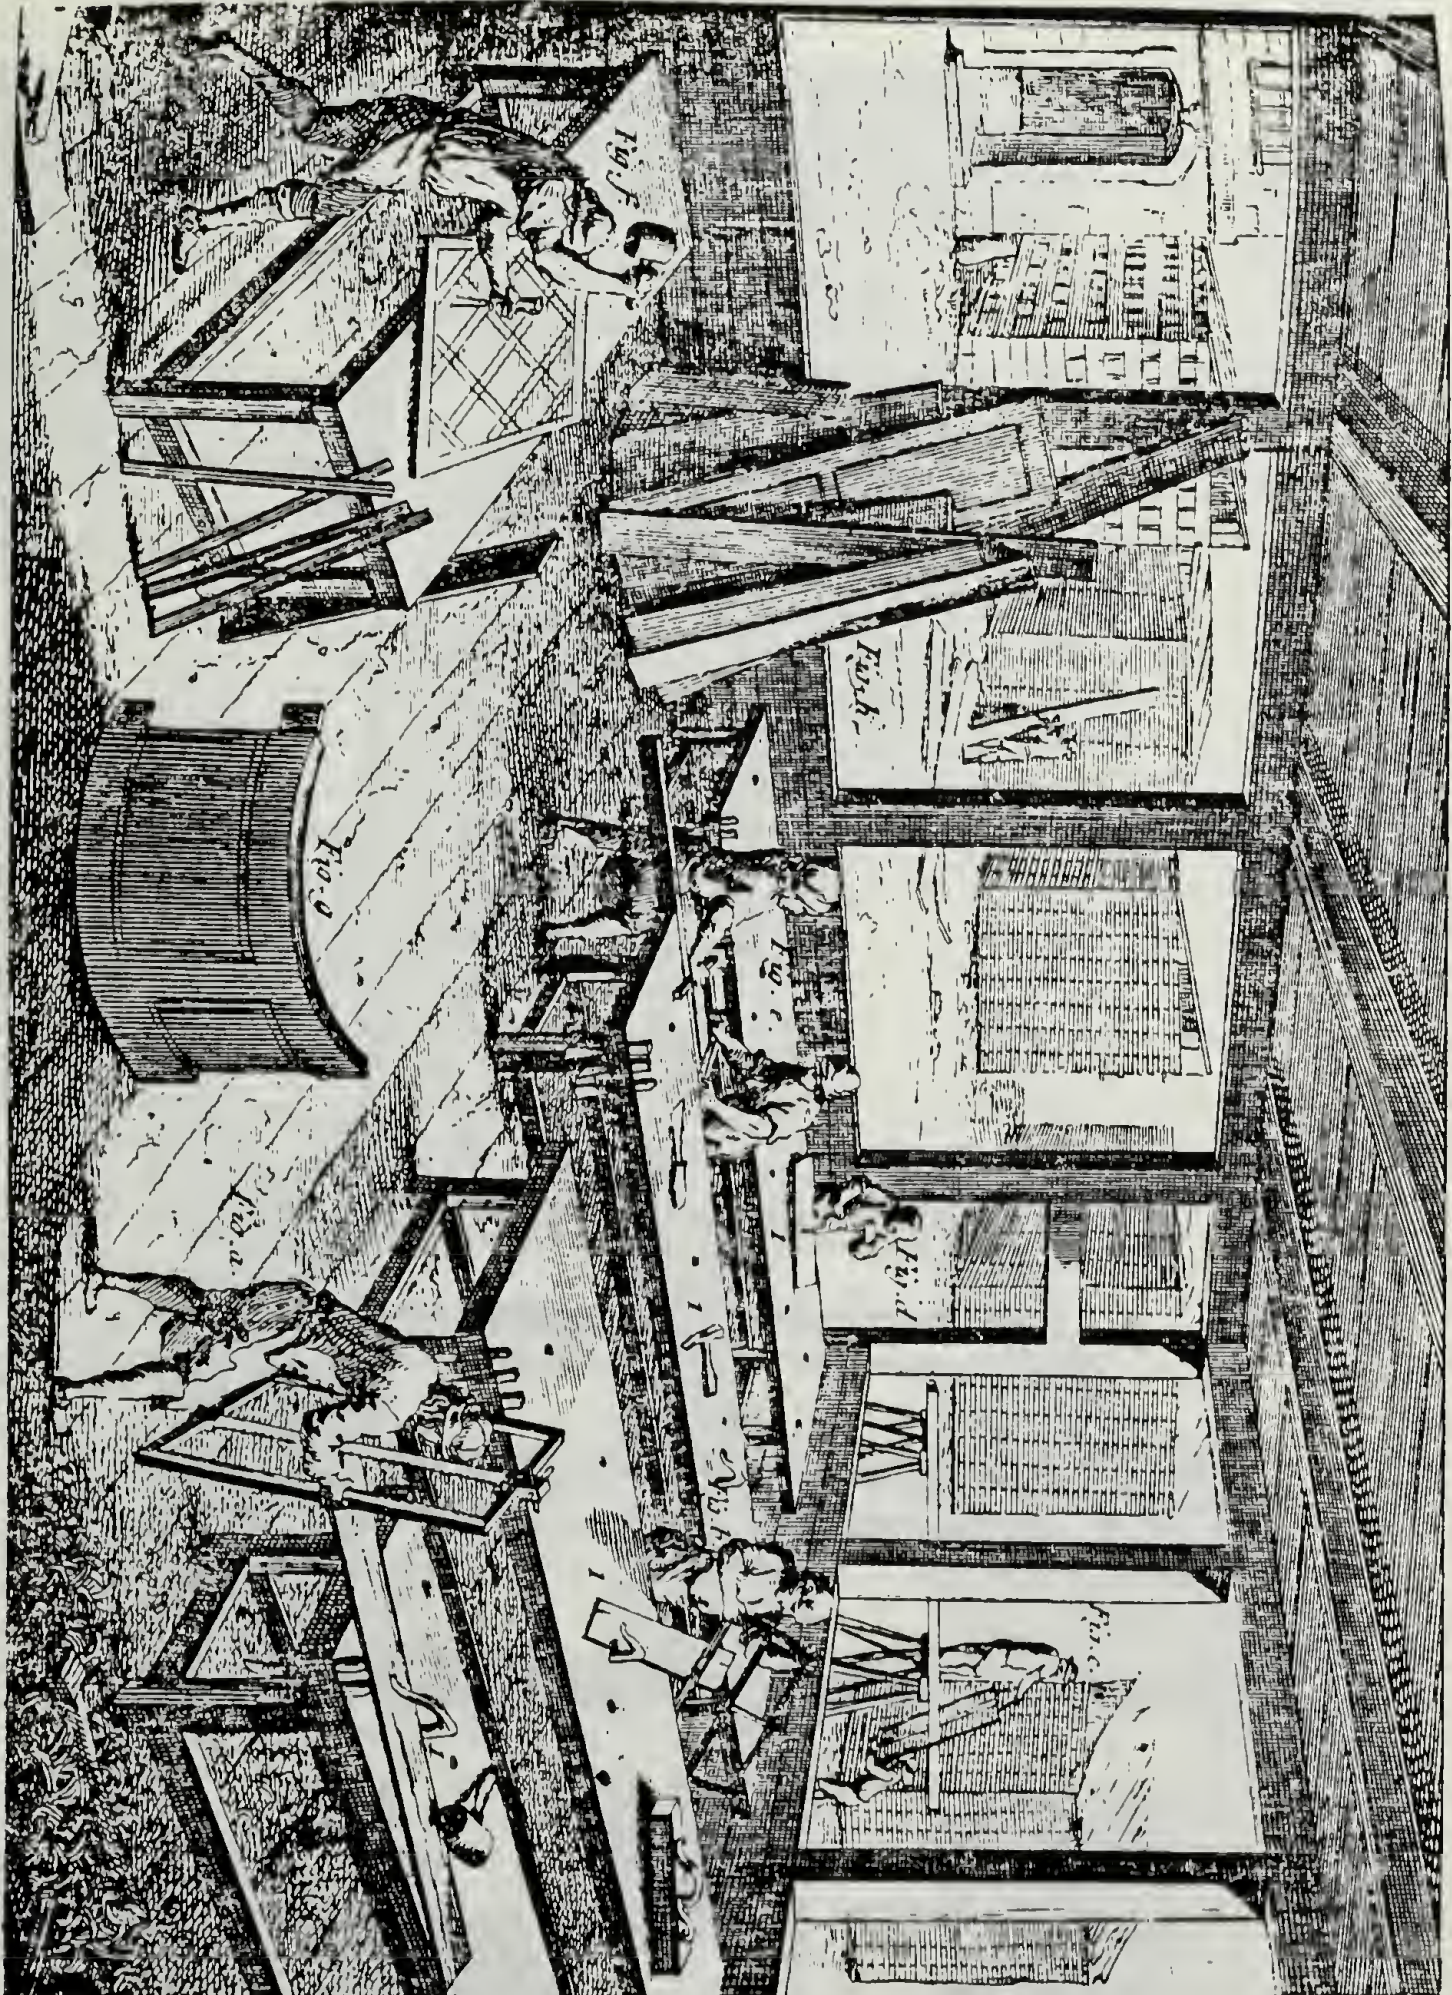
CONSTRUCTION SITE (EXTERIOR)
